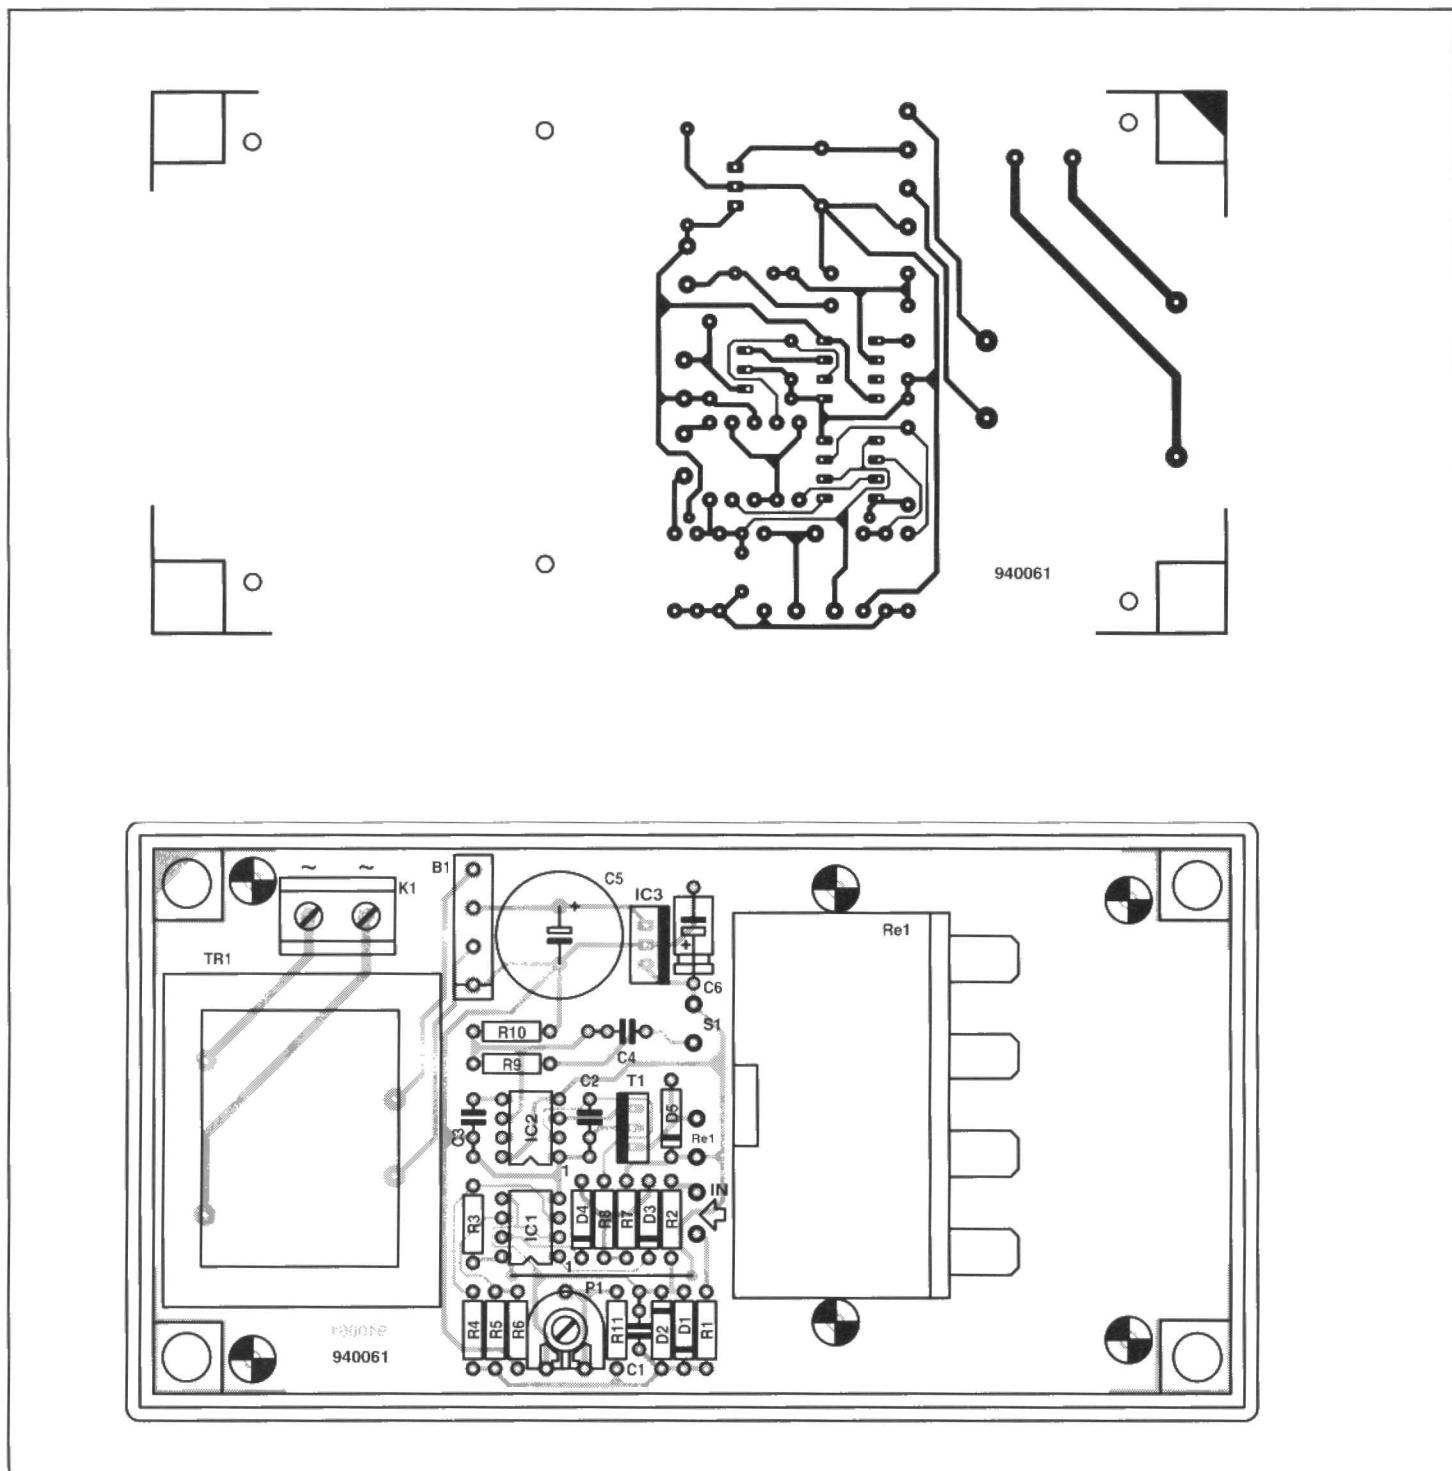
Track layout (direct reading) and component mounting plan of the printed circuit board designed for the resettable fuse (PCB not available ready-made).
